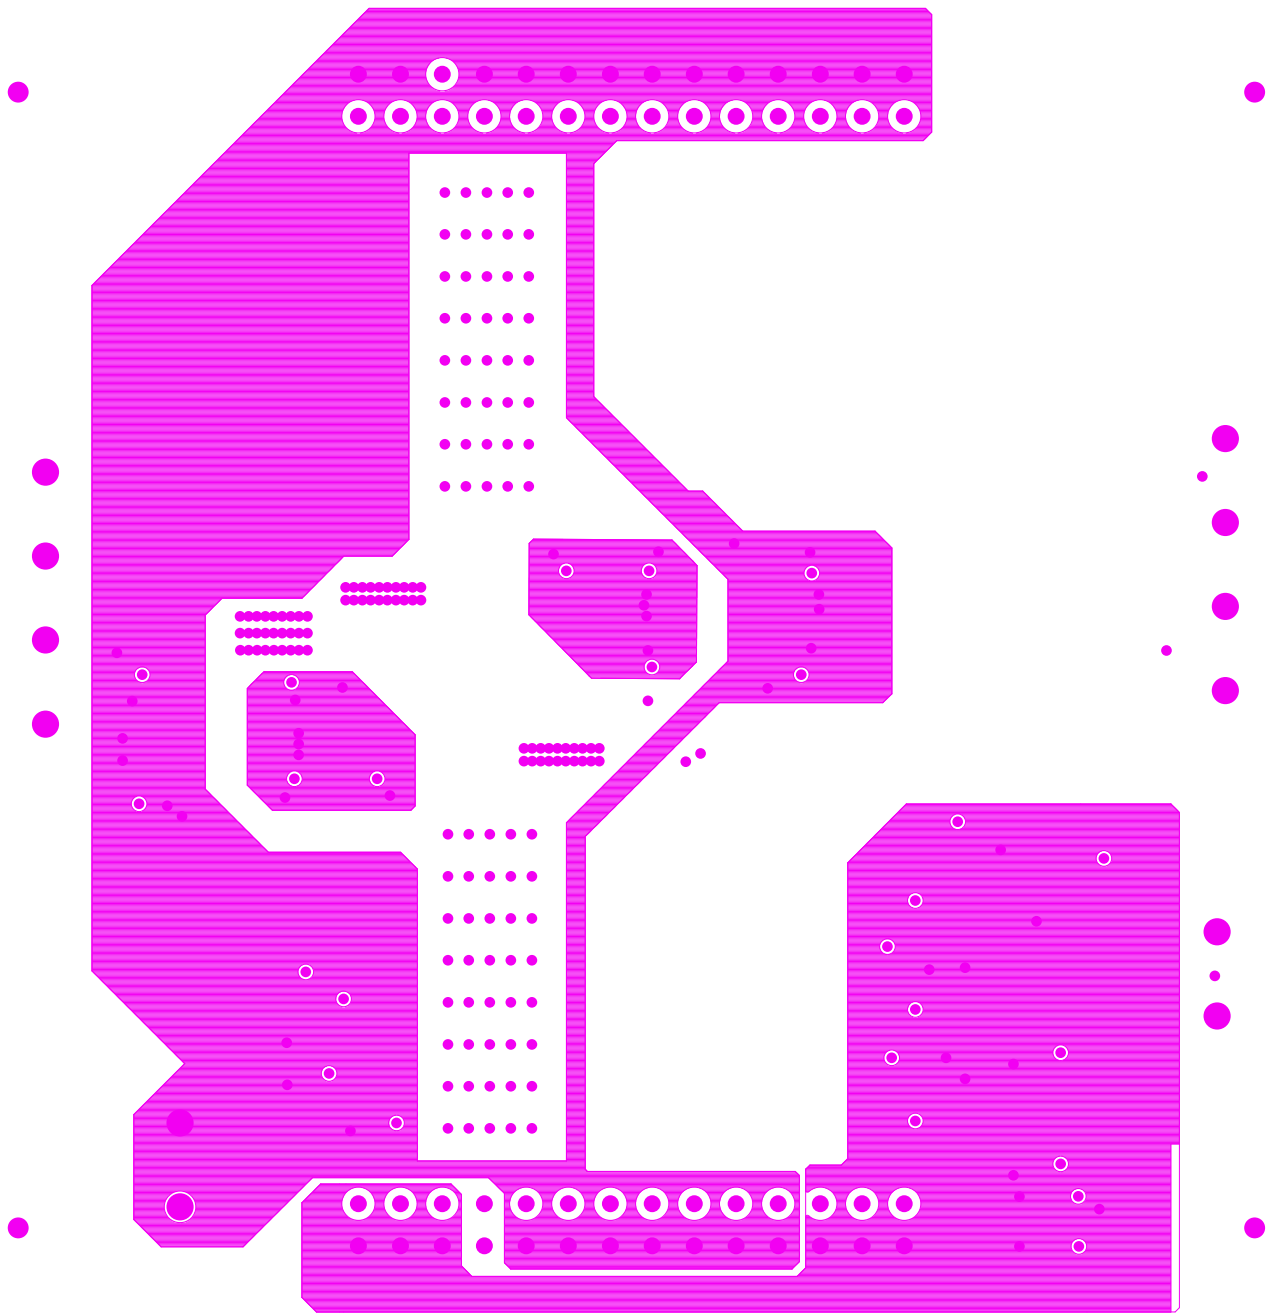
PCB layout inner layer 1 of SSB hardware prototype in Chapter 4.
